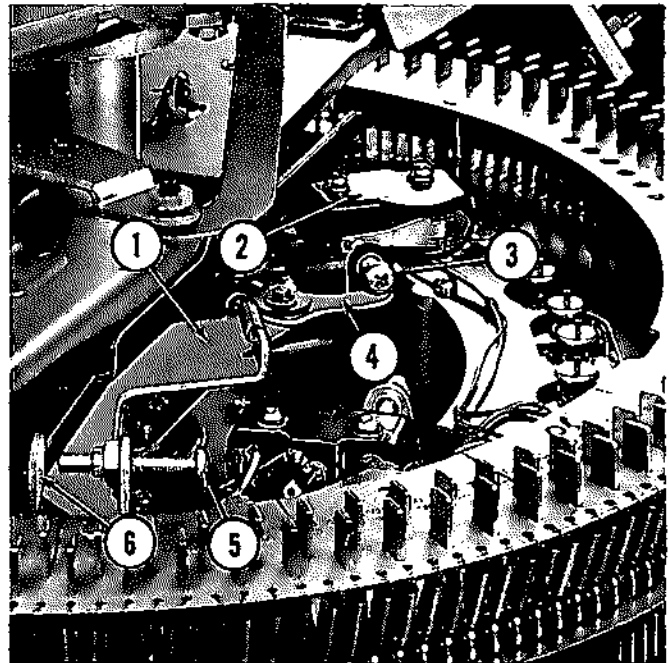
ACTUATING SCREW ADJUSTMENT, CARRIAGE SWITCH
